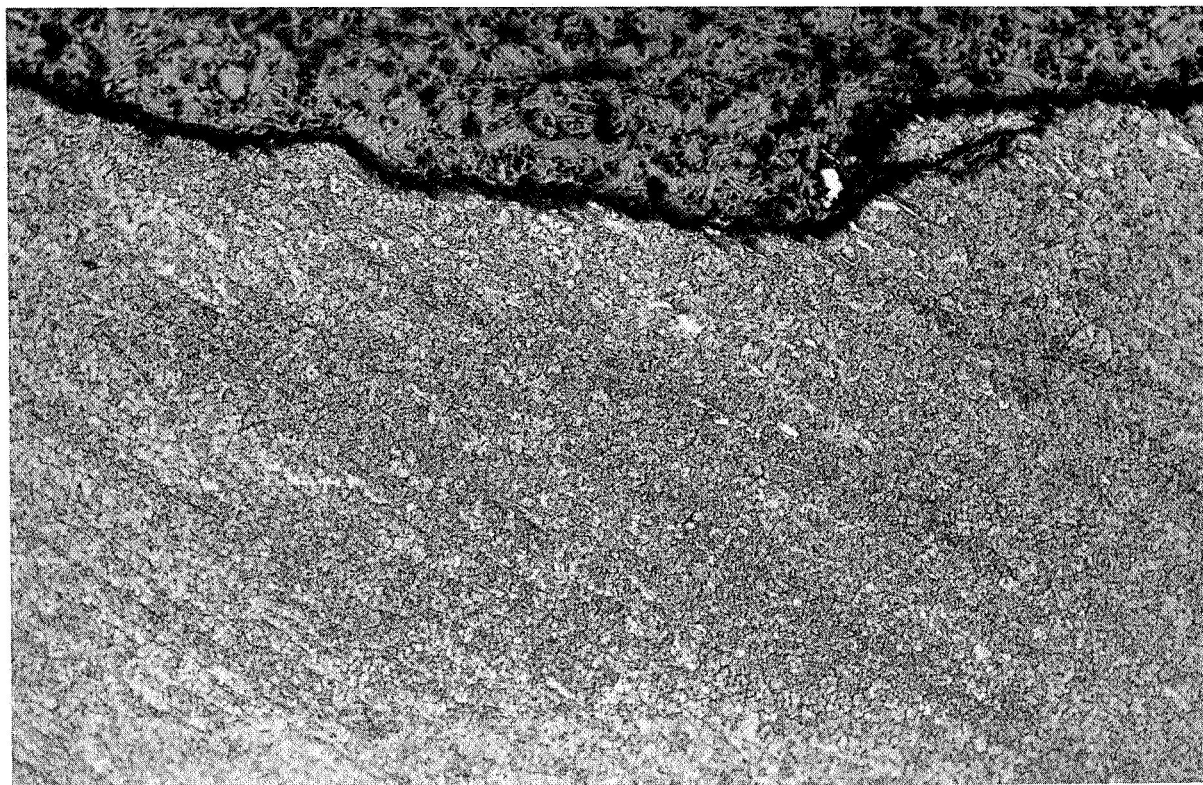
INNER RING FATIGUE FAILURE
